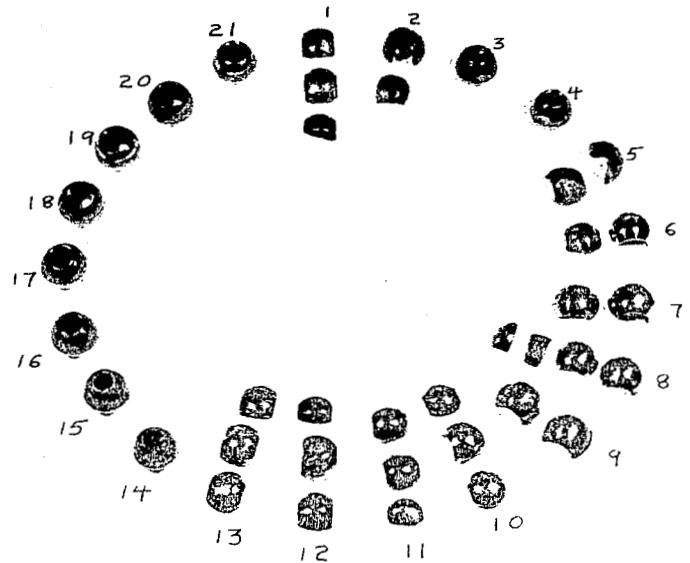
Appearance of Twenty-One Damaged Drilled Balls – Drilled-Ball Bearing
